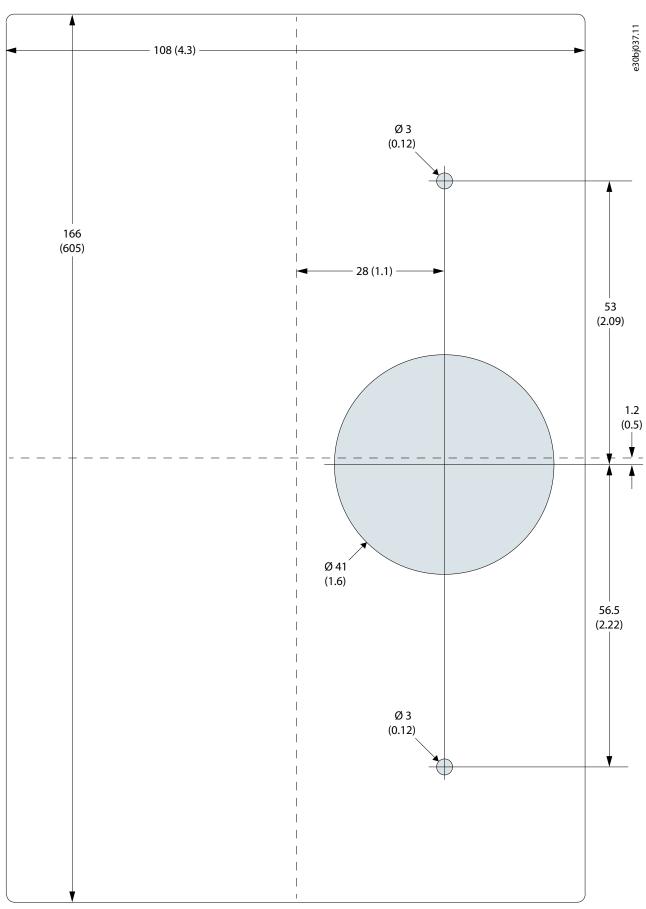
Surface Mounting Drilling Template View from front. Dimensions in mm (in)
